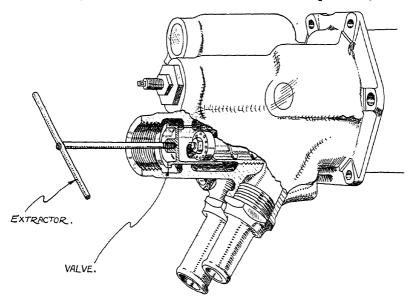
Extracting high initial oil pressure device valve from oil pump body.
